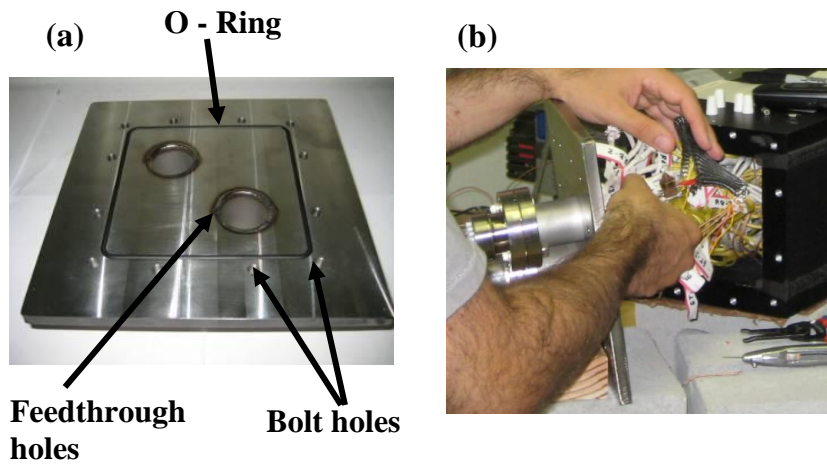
(a) Endplate with high temperature perfluoroelastomer (315°C) O-ring, two holes for thermocouple and power feedthroughs (not shown) and twelve holes for the bolts (b) Wire and connectors filled gap between the spacer plates and the endplate before closure. Feedthroughs can be seen attached to outer surface of endplate.
